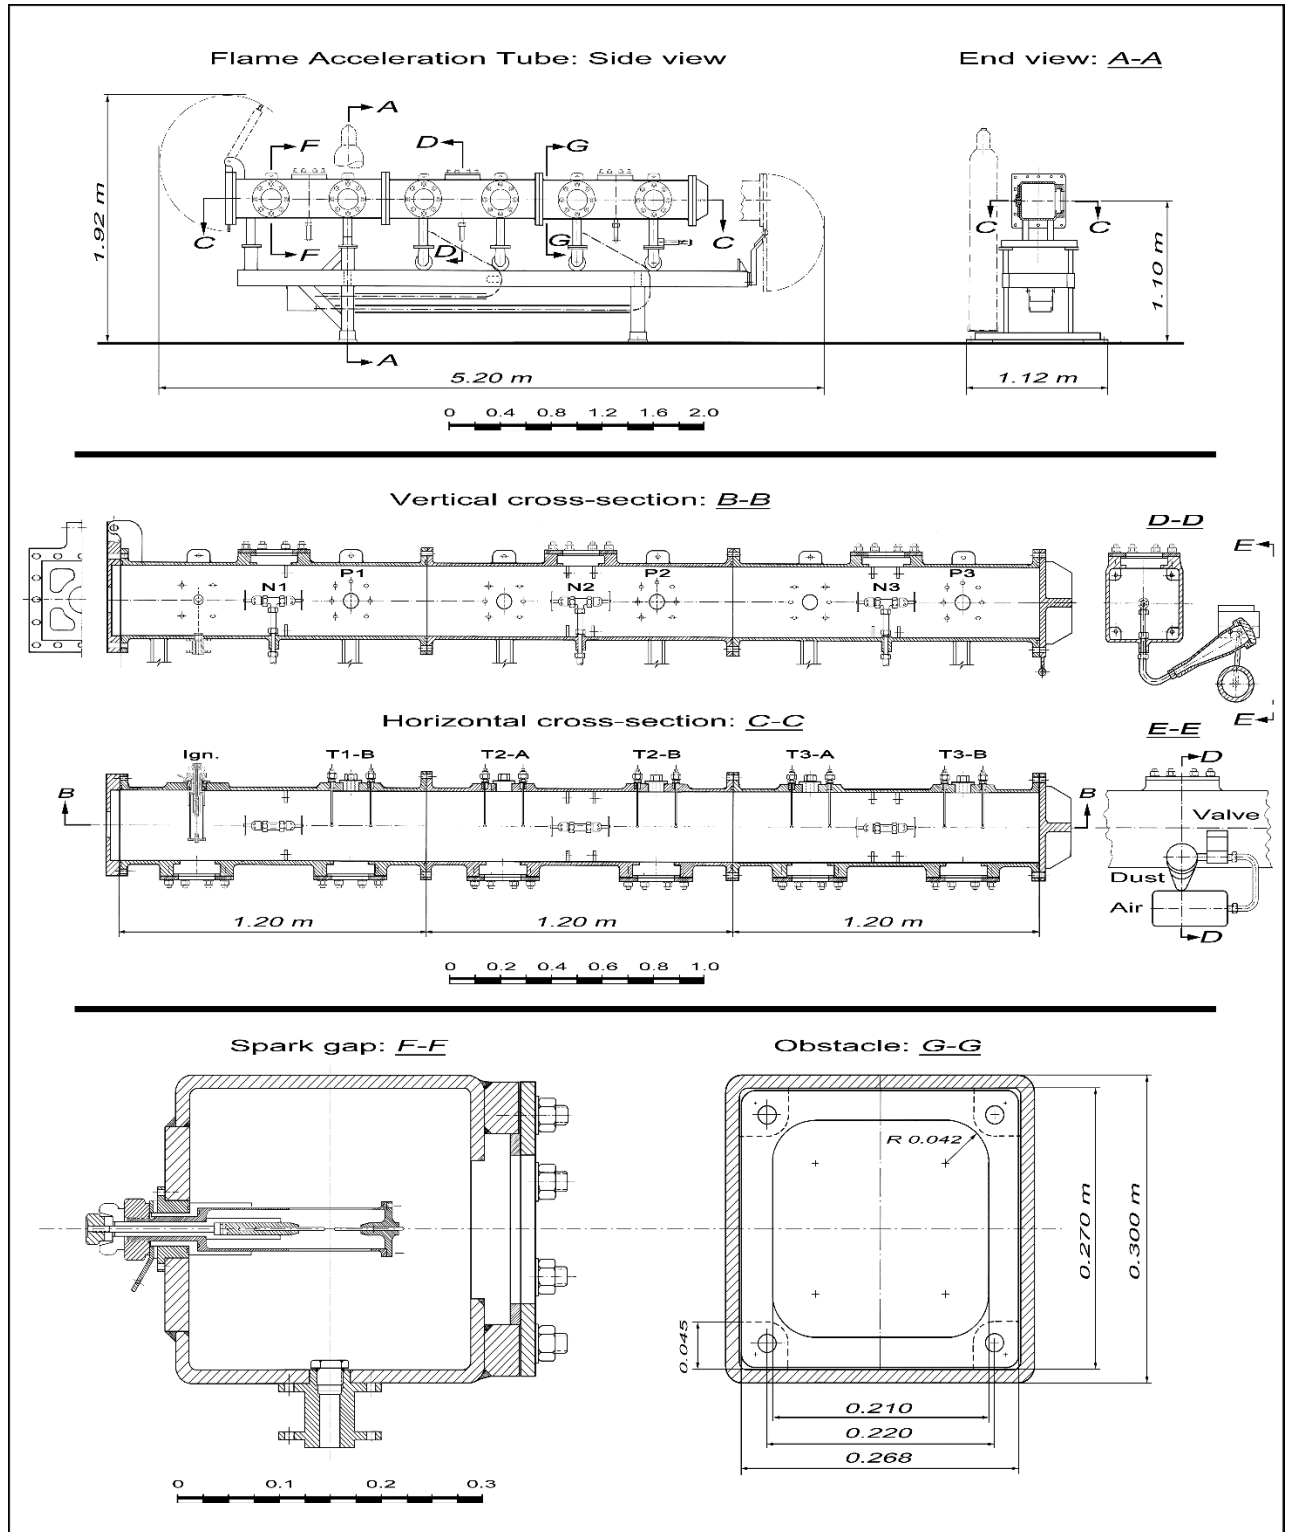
Technical drawing of the 3.6-m flame acceleration tube.
